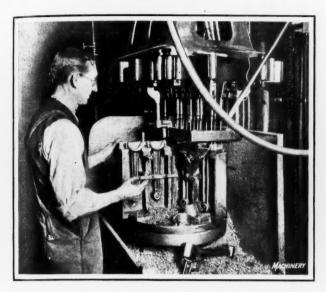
Machine Set-up employed in drilling and reaming Bolt Holes in Connecting-rods and Caps
